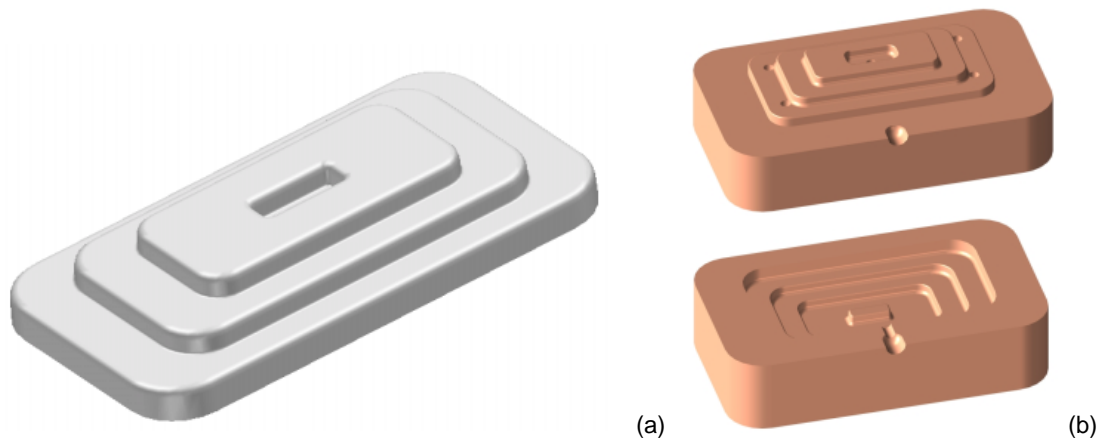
Test part geometry (a) and mould inserts – core and cavity (b)
